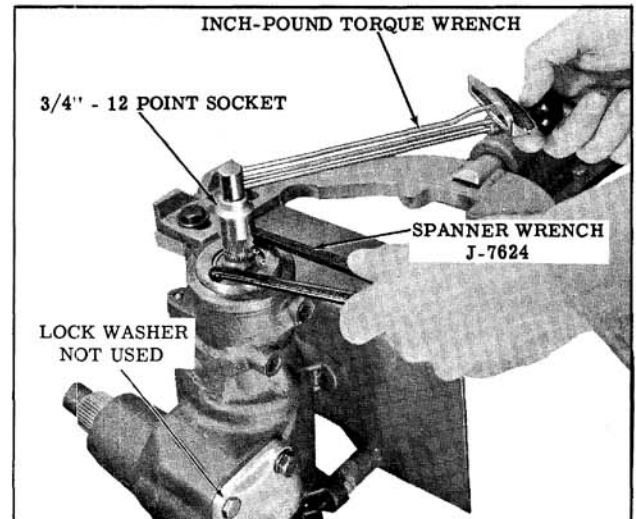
Adjusting Thrust Bearing Pre-Load
